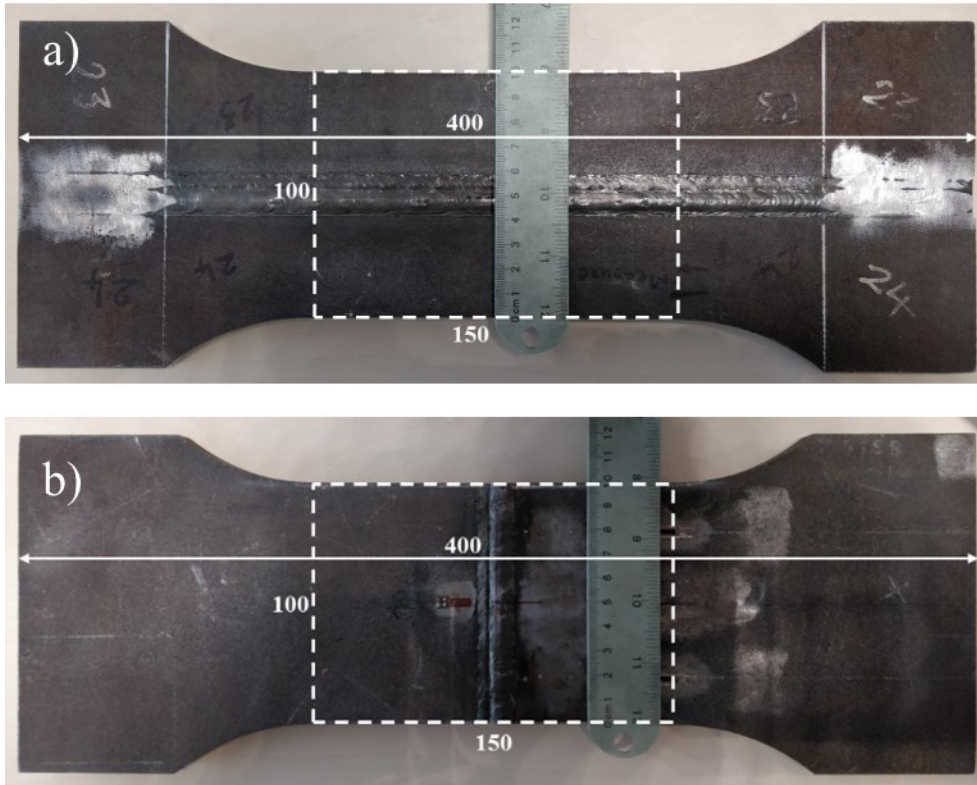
Photographs of the butt-welded plates after EDM cutting: a) Butt-welded plate with the long weld, and b) butt-welded plate with the short weld.
